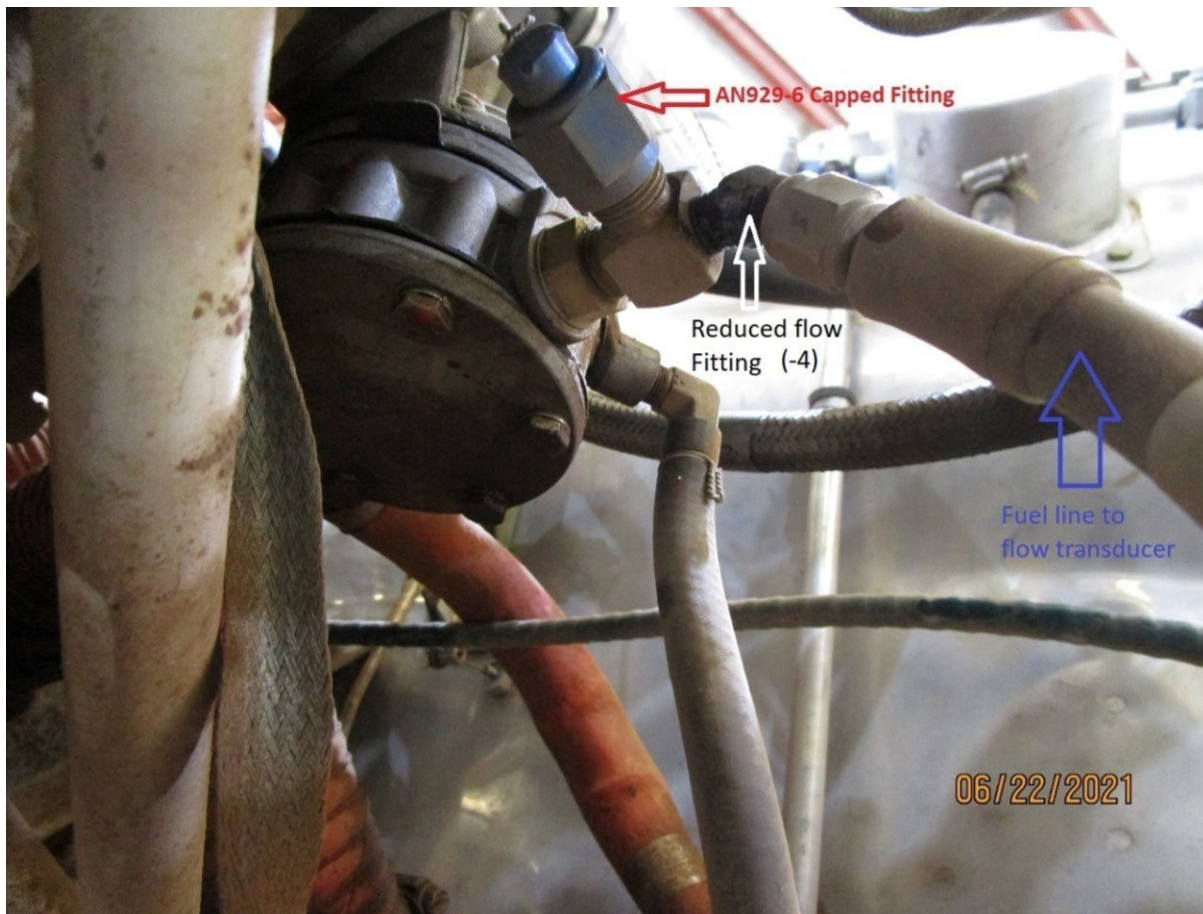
Fuel Line as it exited to the Engine Driven Fuel Pump
